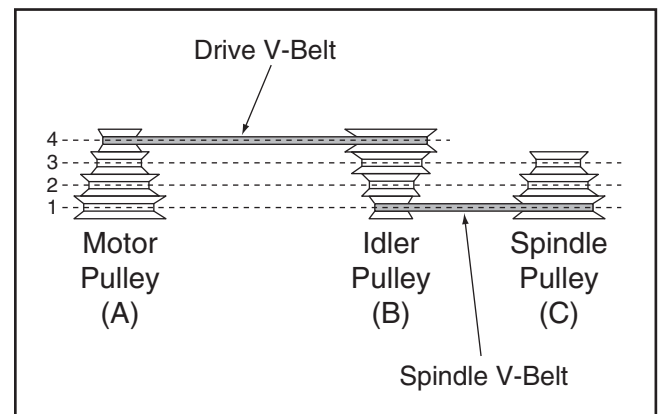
Mill V-belts configured for a mill spindle speed of 315 RPM.
